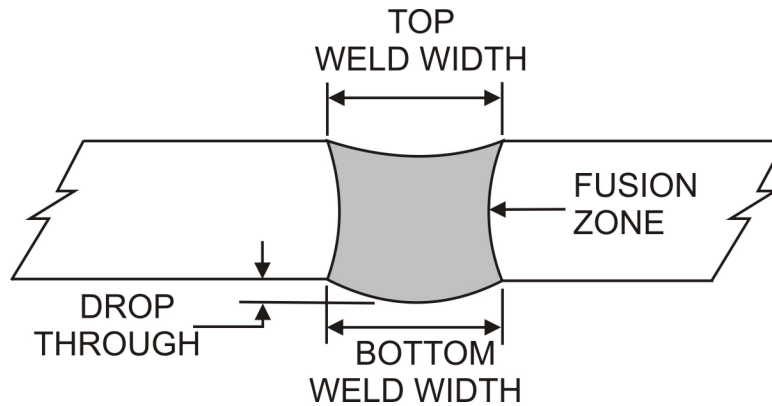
Typical measurements for characterizing DSAW welds.
